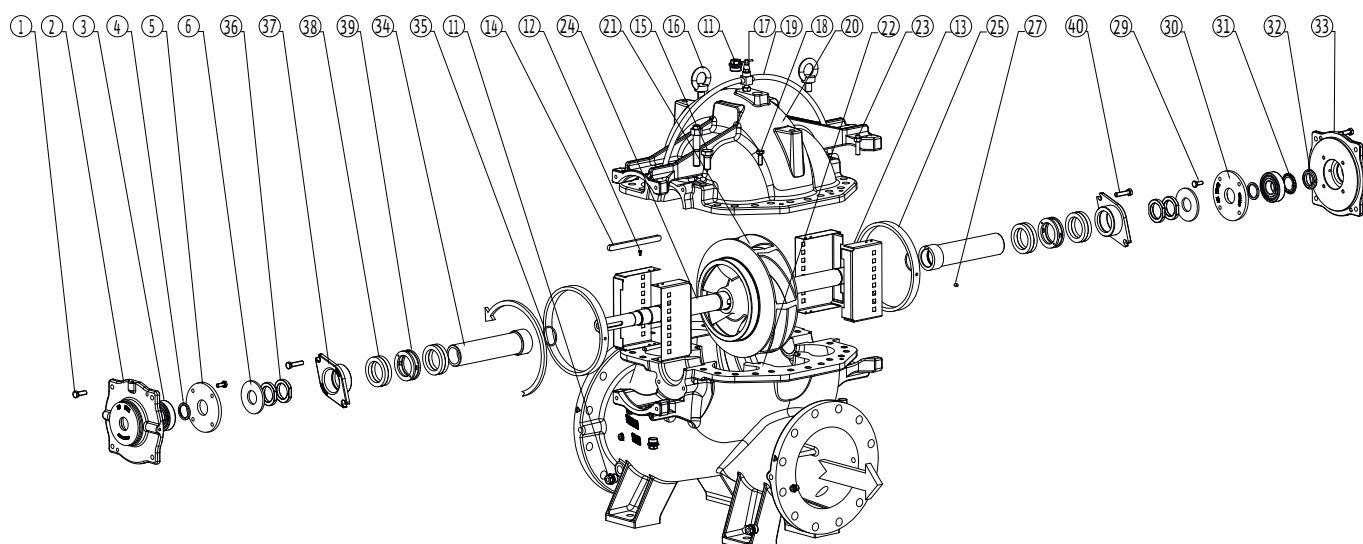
Exploded view of Atmos TERA-SCH hydraulic (version with gland pack)
